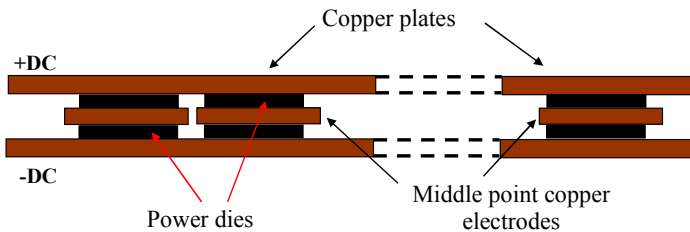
Power die assembly into a busbar like power module based on the Chip on Chip concept
